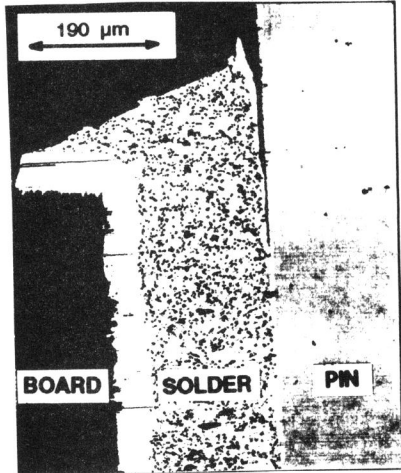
Microcrack at the pin-solder interface on a printed circuit board
